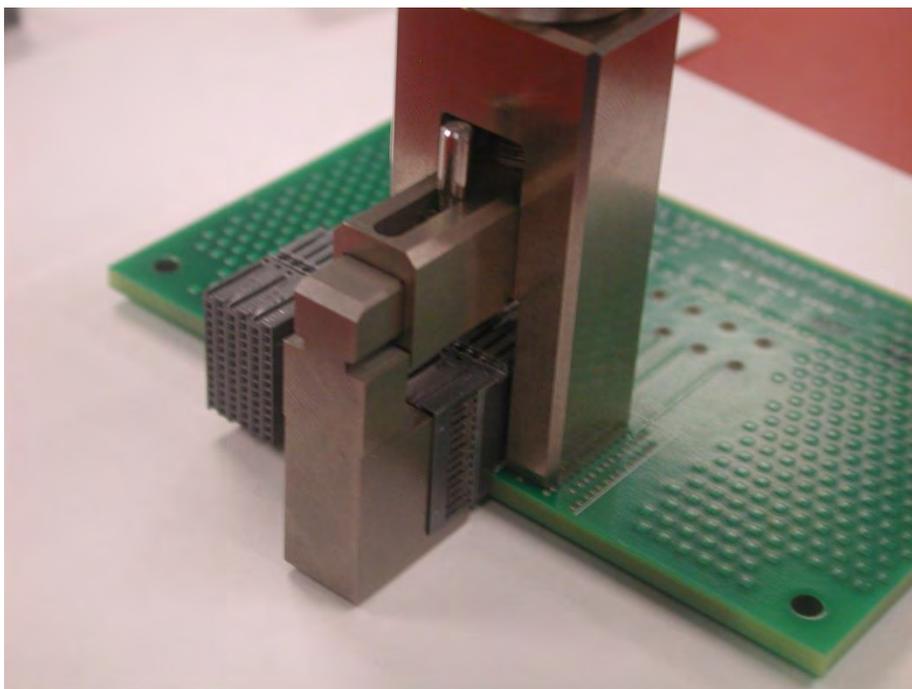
Daughtercard Module Removal Using 'Push Off Board' Configuration
